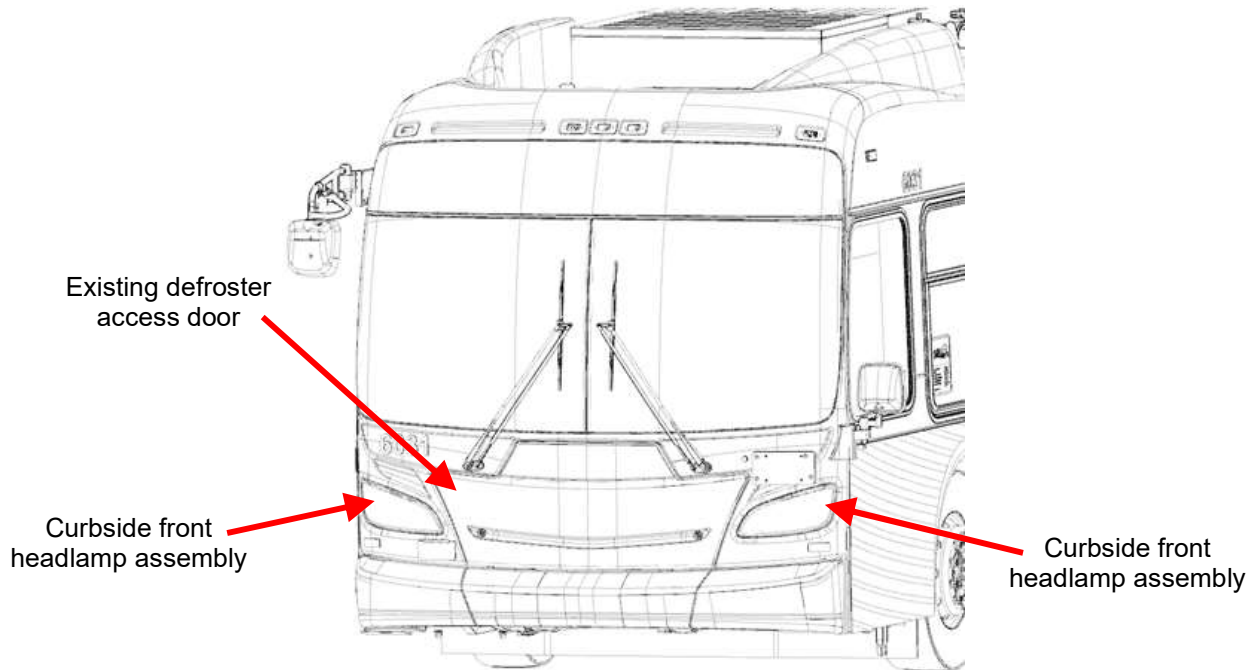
Headlamp Assembly and Defroster Access Door Locations
